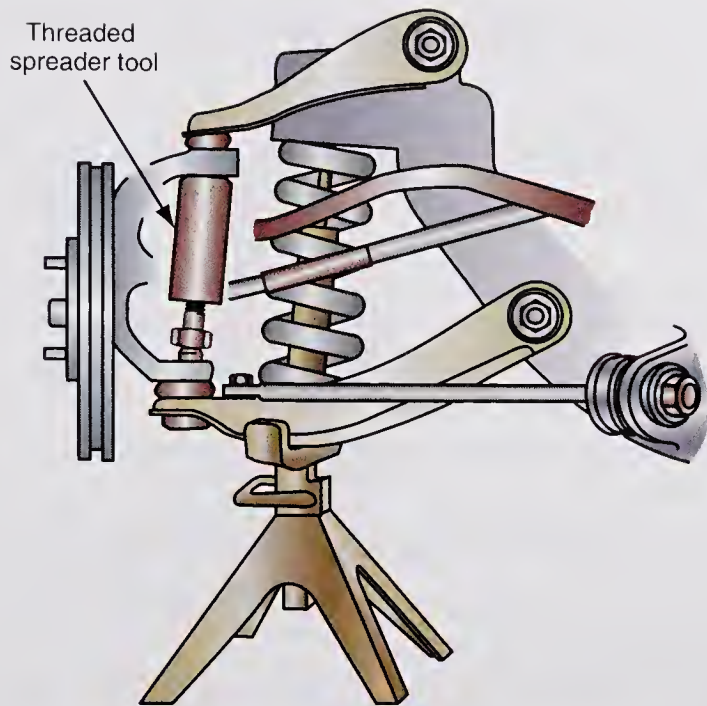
Removing the lower ball joint from the steering knuckle.
